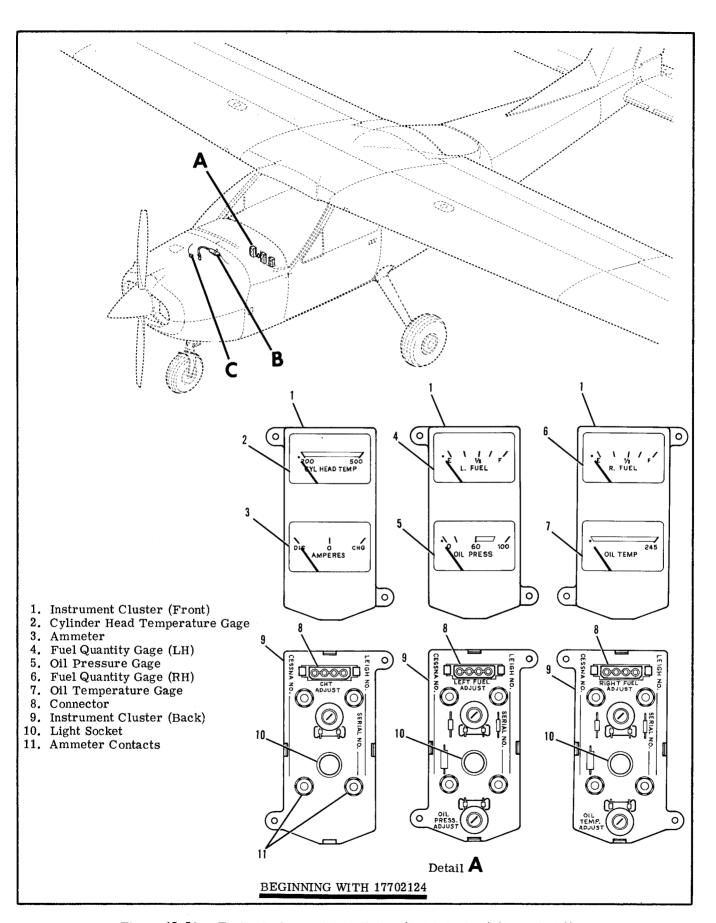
A. Engine Instrument Installation (Leigh System) (Sheet 1 of 2)
